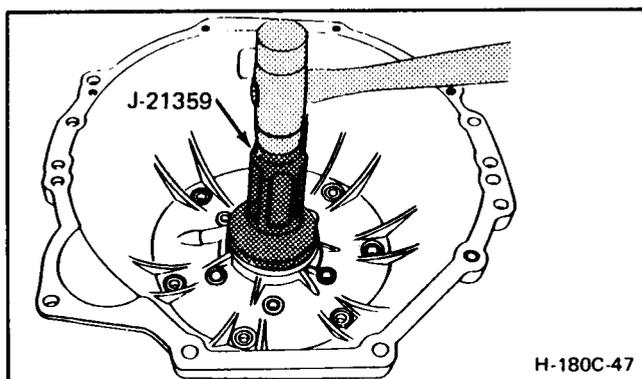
C-64 Installing Reverse Clutch Piston Spring Retainer
